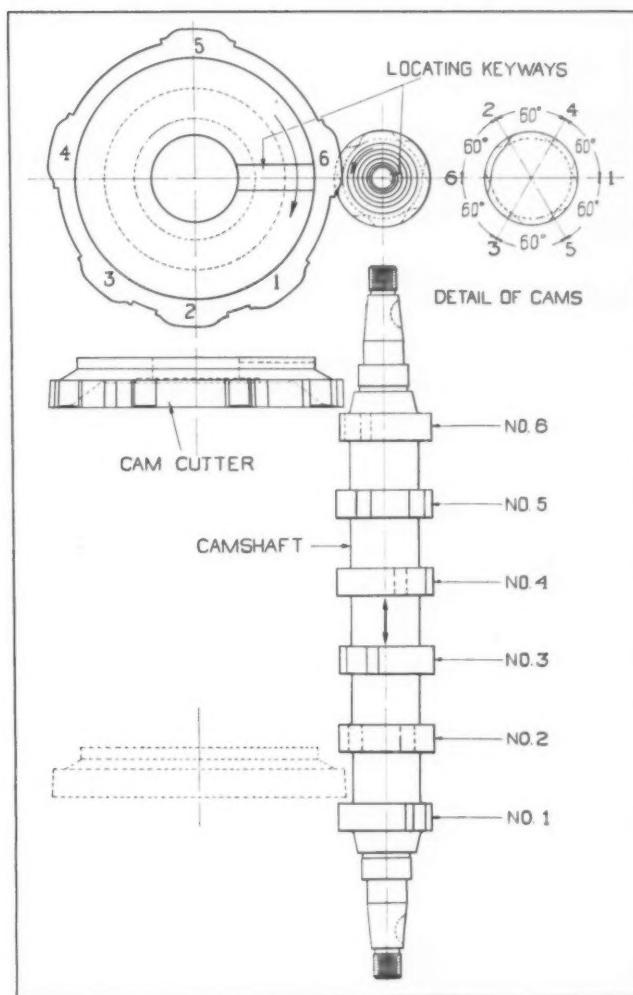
Diagram Showing the Lay-out of the Six Cams Cut on One Camshaft in a Single Operation Performed on a Gear Shaper. The Lay-out of the Cam Cutter is Also Shown
